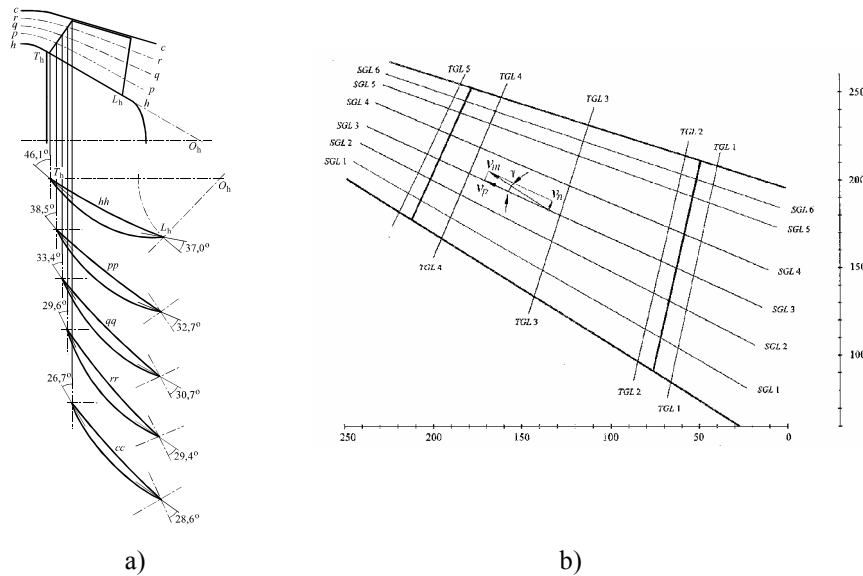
a) Impeller Blade Profiles Showing Inlet and Outlet Angles,
